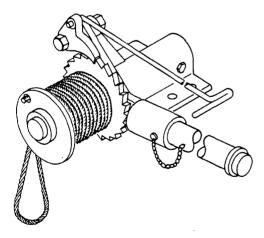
Load Binding Winch Assembly (P8T Trailer)
